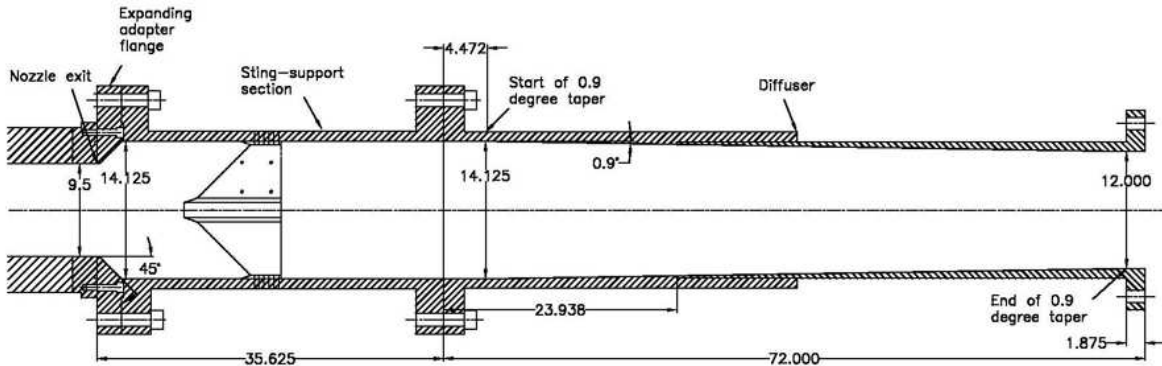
Schematic of modified sting-support and diffuser sections with test section. Dimensions in inches.
